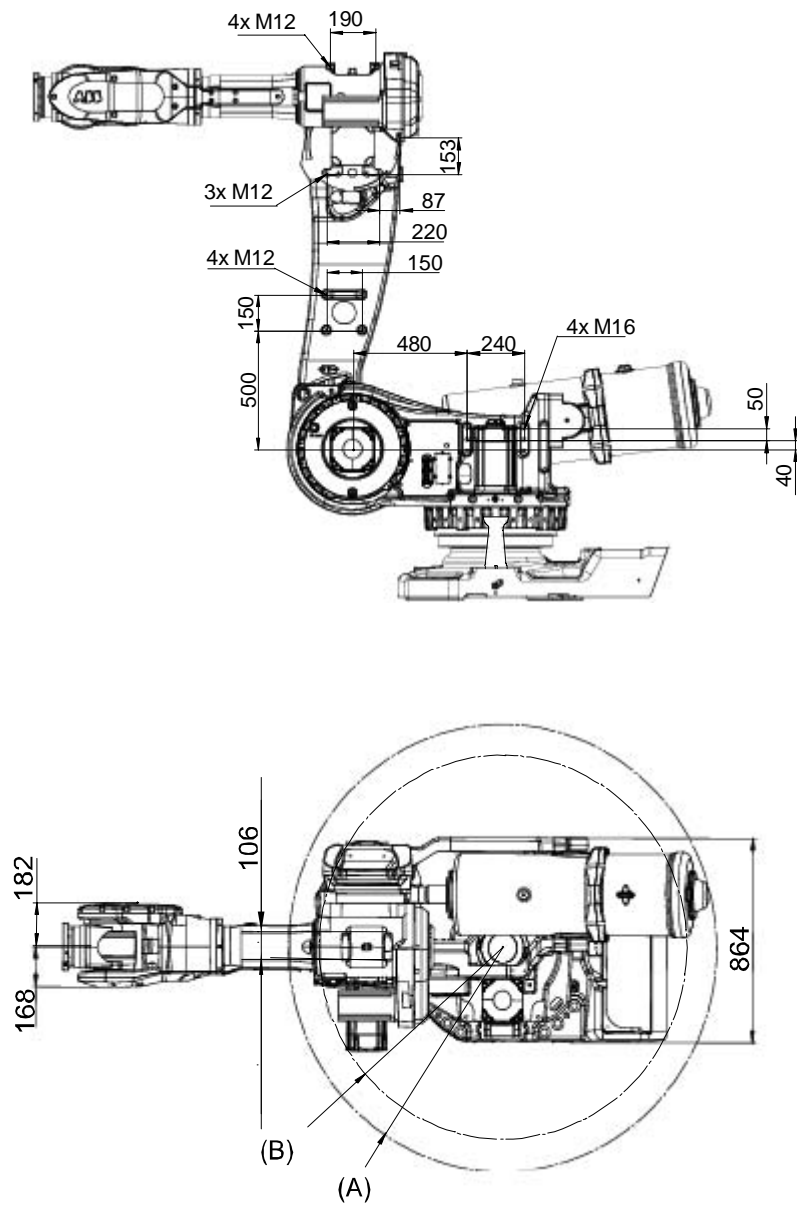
Holes for mounting extra load on upper arm on IRB 6650S (dimensions in mm).
